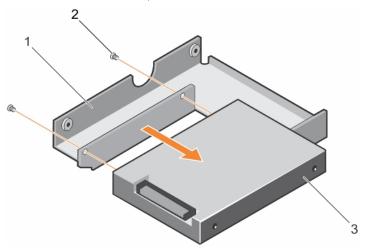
Removing a 2.5-inch hard drive from a 3.5-inch hard drive adapter
